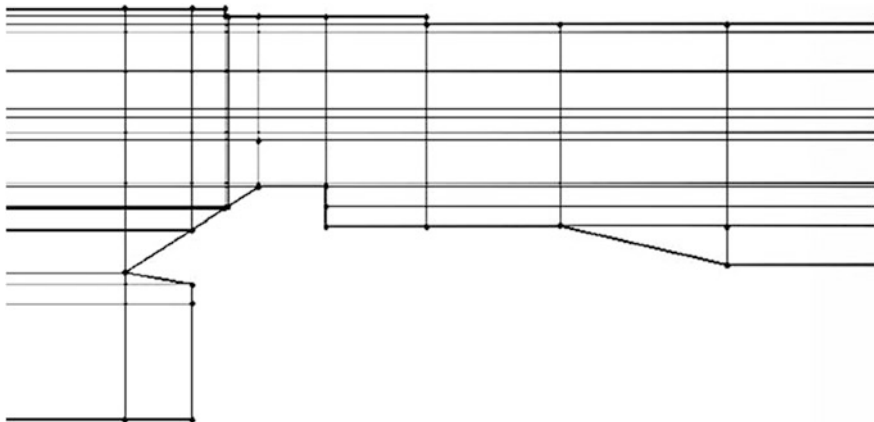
Initial spindle assembly model partitioning and bearing location
